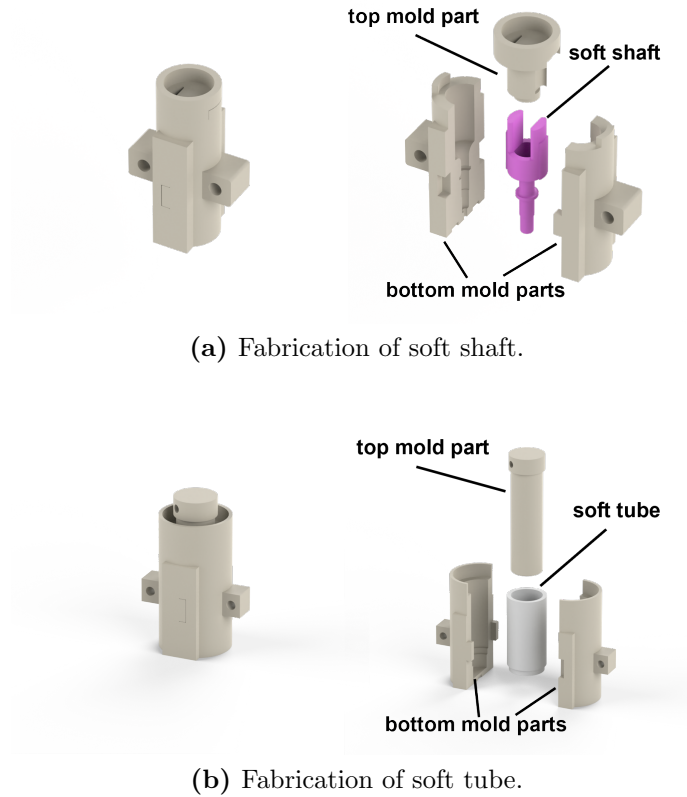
Each mold contains three pieces, in which the bottom two pieces shape the external profile, and the top piece extrudes the internal cavity.
